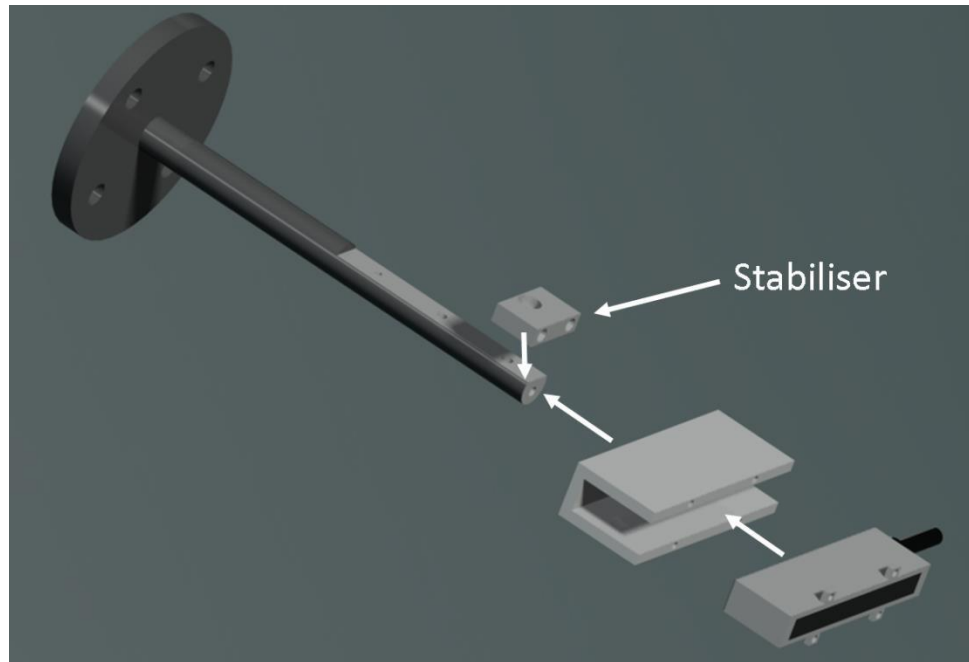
Exploded view of the second probe mount for Tool 2. The stabiliser, which ensures the probe maintains the appropriate placement relative to the robot, is marked.
